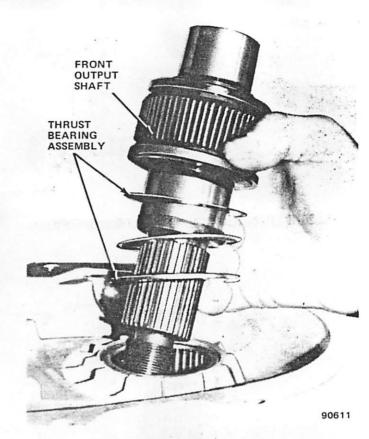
D-16 Front Output Shaft and Front Thrust Bearing Assembly — Removal/Installation
